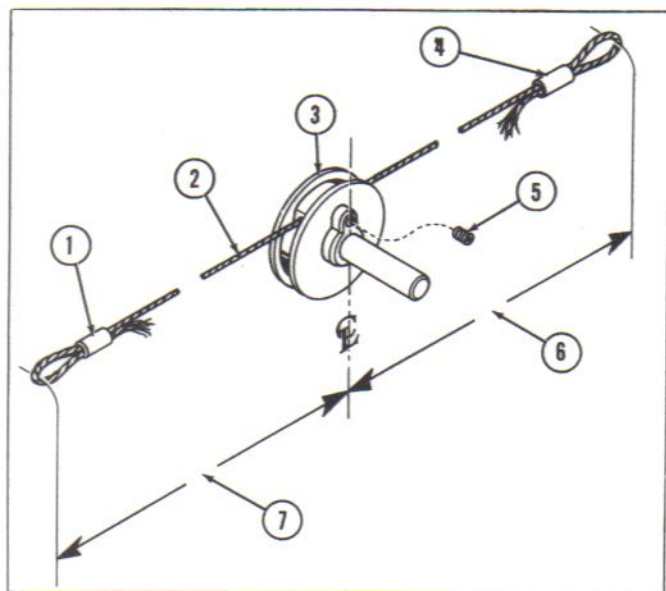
INSTALLATION OF TURNTABLE CABLE
